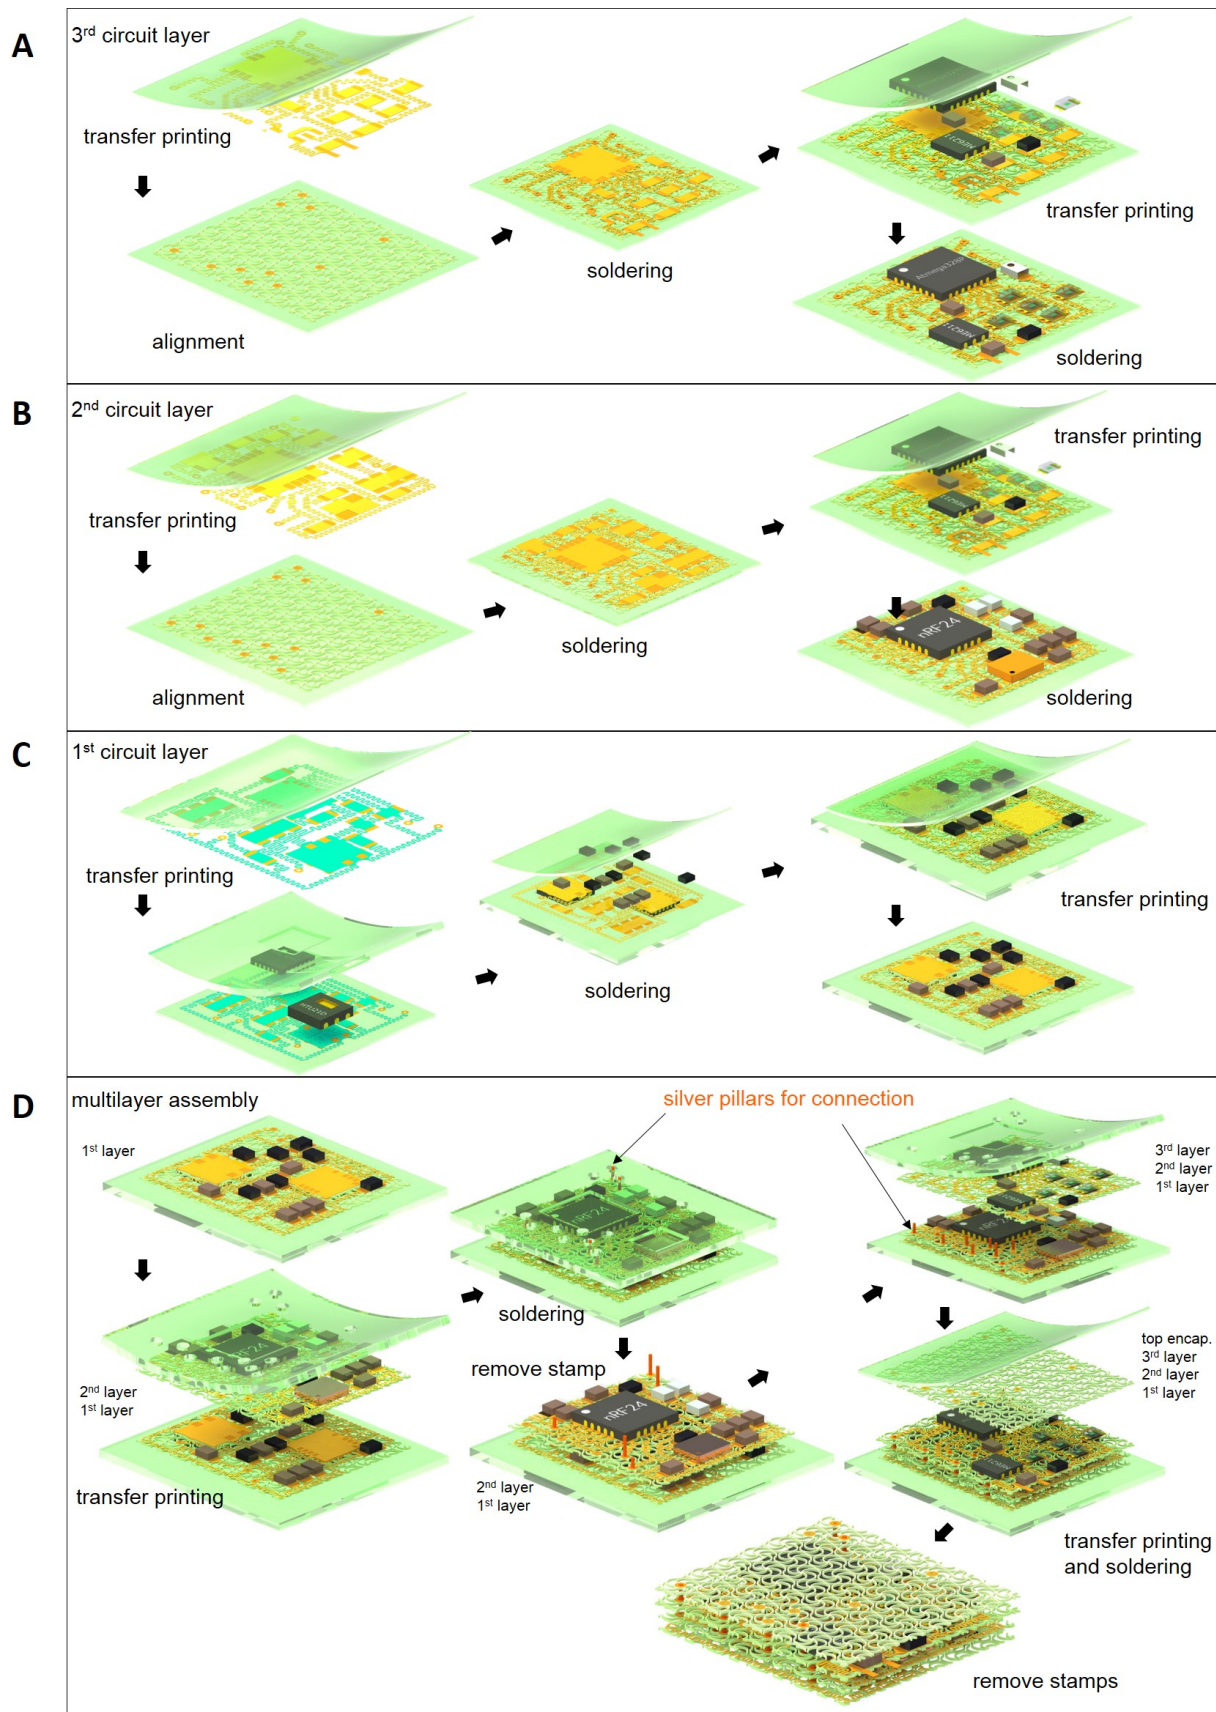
Schematic diagram to show the transfer, assembly and manufacturing process of the device.
